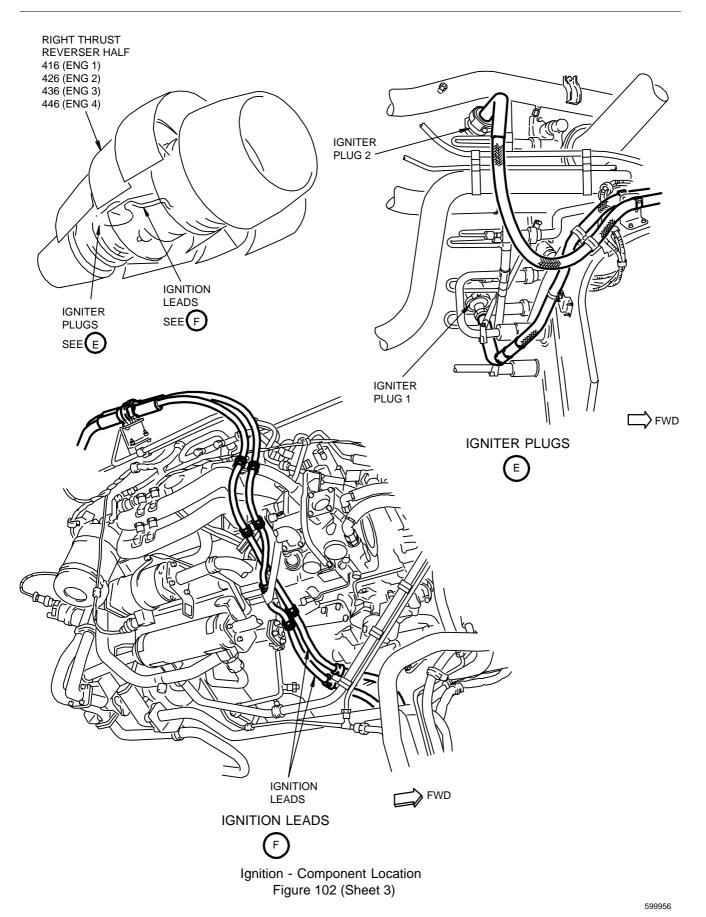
74-00 Ignition Component Location Fig. 102 (Sheet 3)
